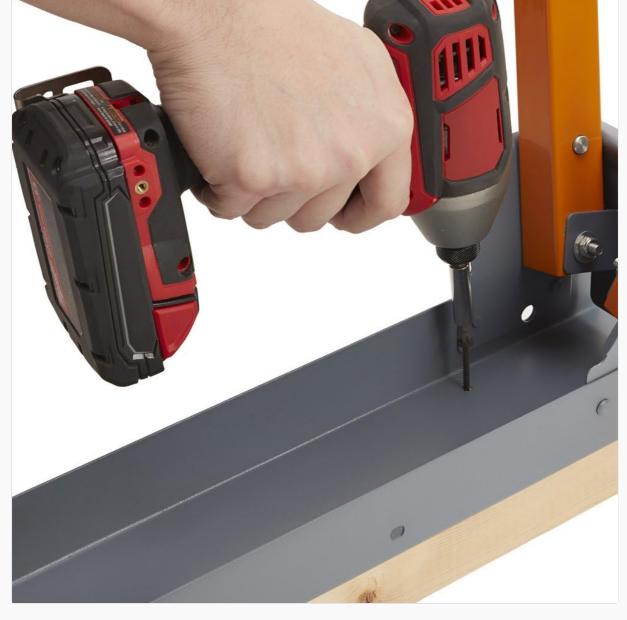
A close-up view demonstrates the process of attaching a wood top to the sawhorse. A power drill is used to drive a screw into the pre-drilled holes, ensuring a secure and stable sacrificial surface for various tasks.
